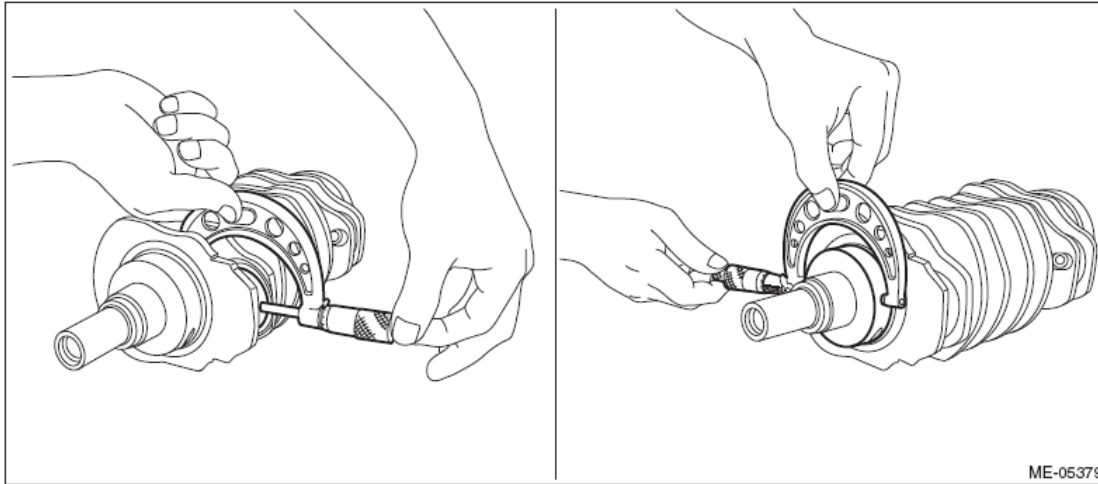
Checking Outer Diameter Of Crankshaft Pin
